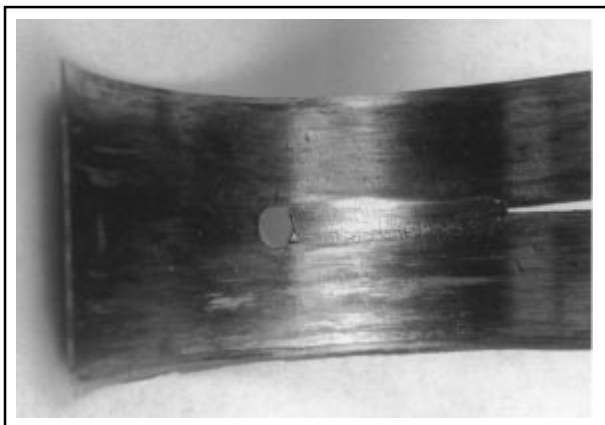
Connecting rod bearing from Crank #2, pin #2
